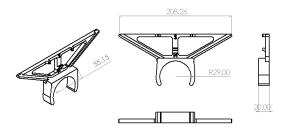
CAD Drawing of the V dipole reflector guide, designed to fit 2" PVC pipe. All measurements shown are in millimeters.
